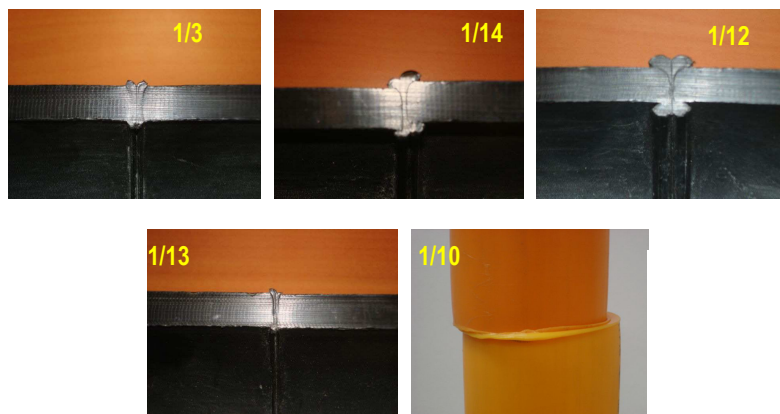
The examples of the most frequently defects by abutting welding, which were find by visual test on welding joints.
